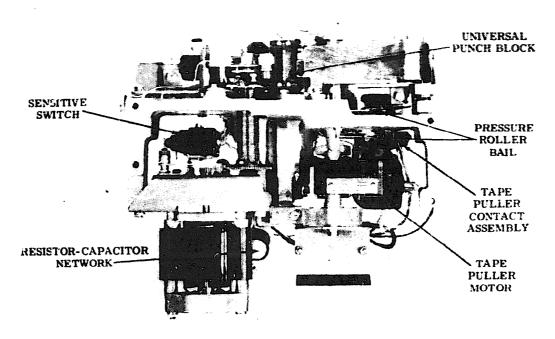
Eight-Level Punch Unit. Bottom View (2400 WPM)
